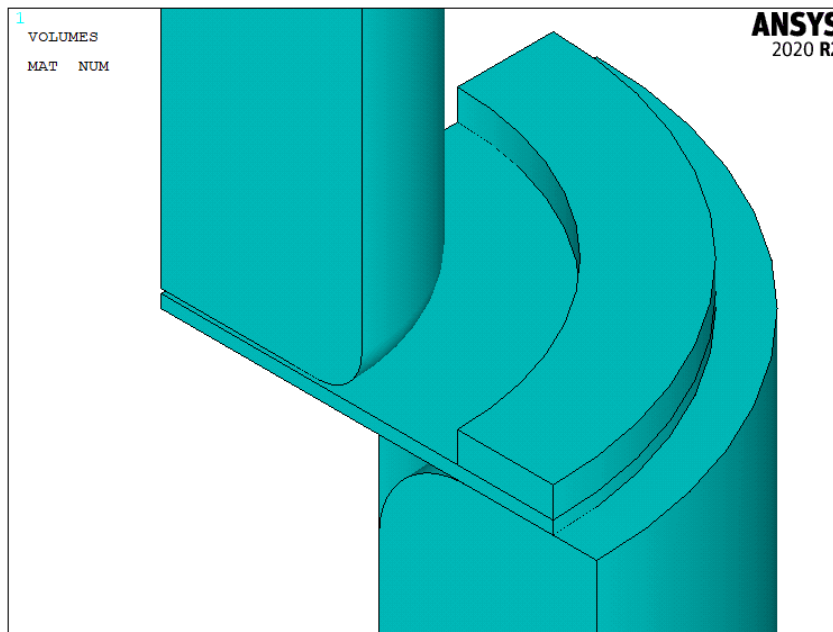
(b): Isometric view of CAD modeling for cylindrical cup drawing
